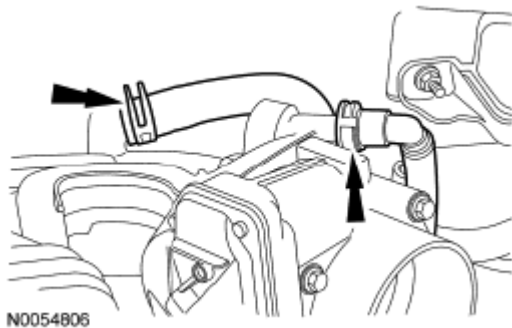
Locating Vacuum Hose & Evaporative Emission Tube
